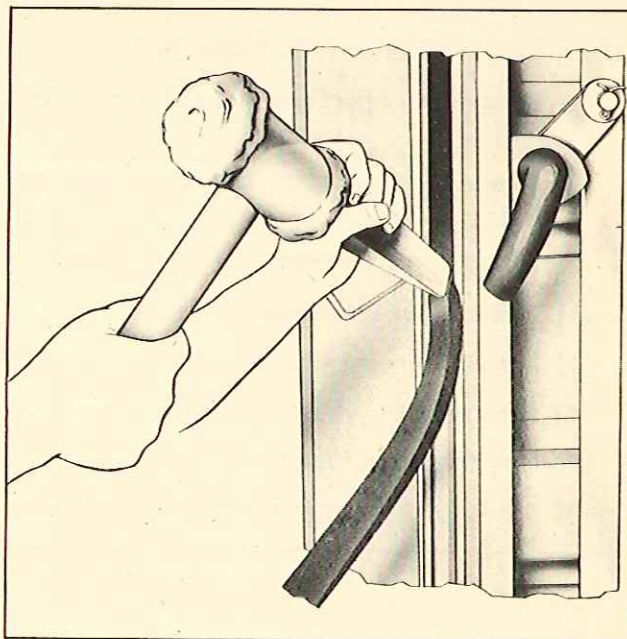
Replacing rubber gasket, TLD-2(crs) and TLD-3(ms) doors.
